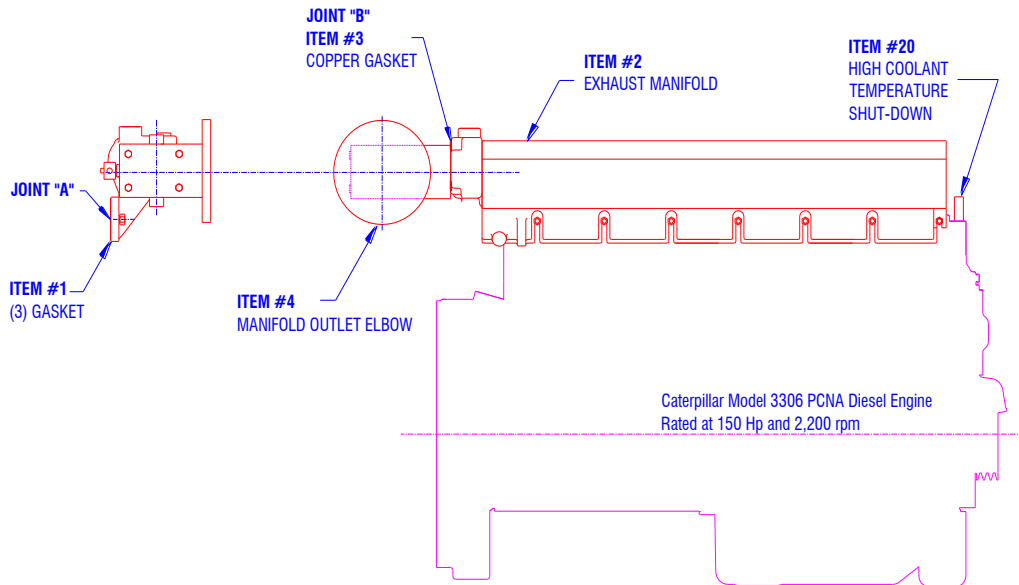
Illustration No. 1: Exhaust System from Engine Outlet to Manifold Outlet Elbow
